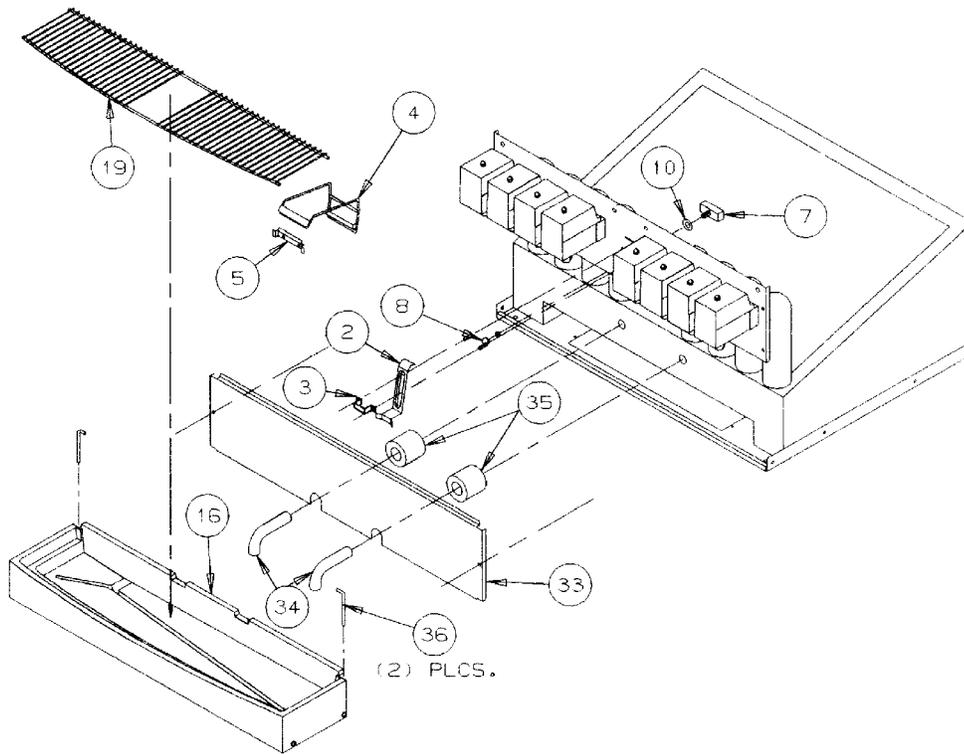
EXPLODED VIEW - LOWER SECTION AND PARTS LIST
